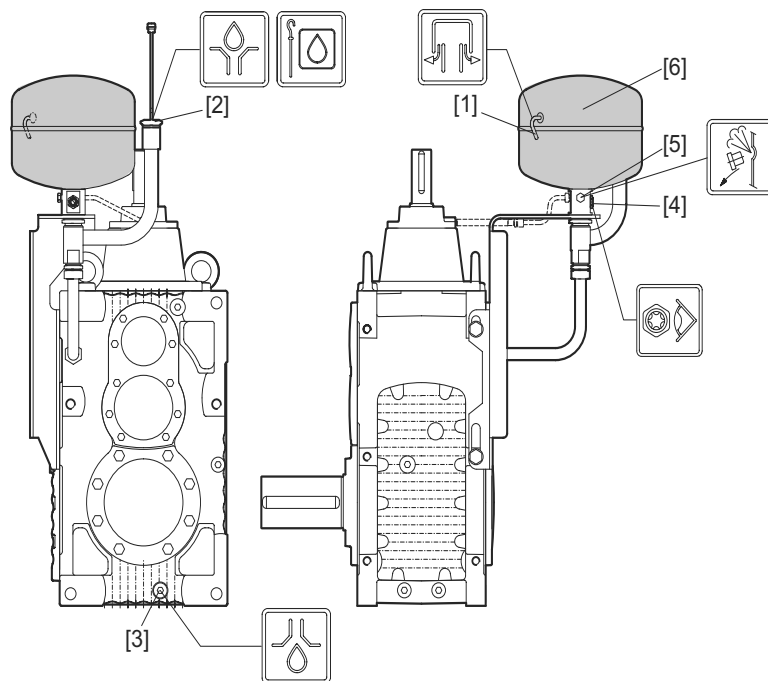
MC.PE../MC.RE.. industrial gear units with steel oil expansion tank
